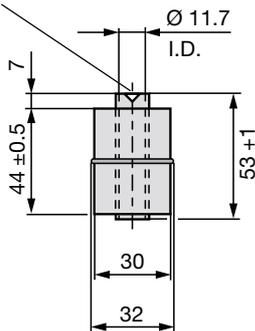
Dimensions of float BTL2-S-3212-4Z
